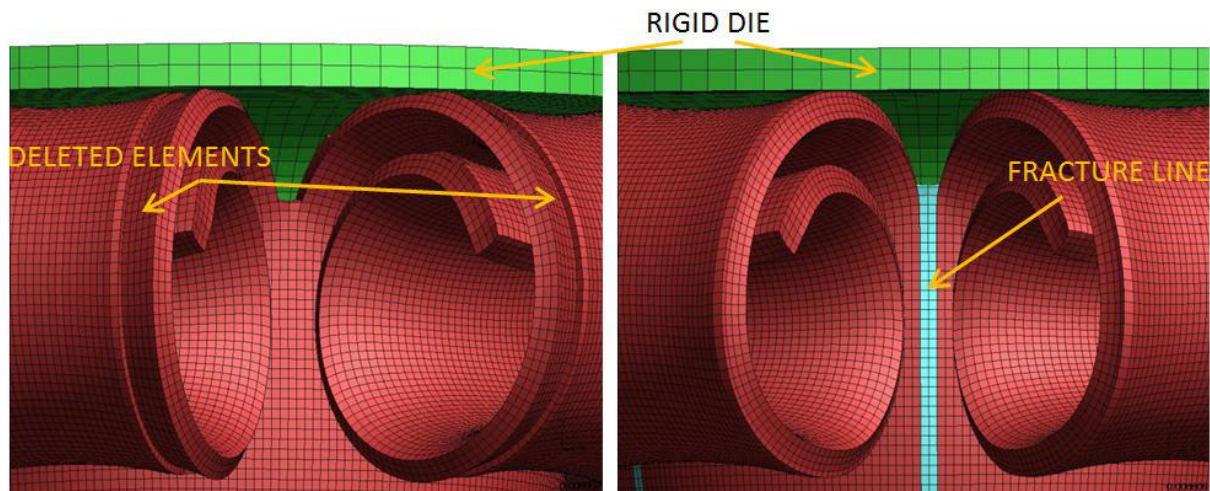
Model without additional part for fracture line (left) and with additional part (right)
